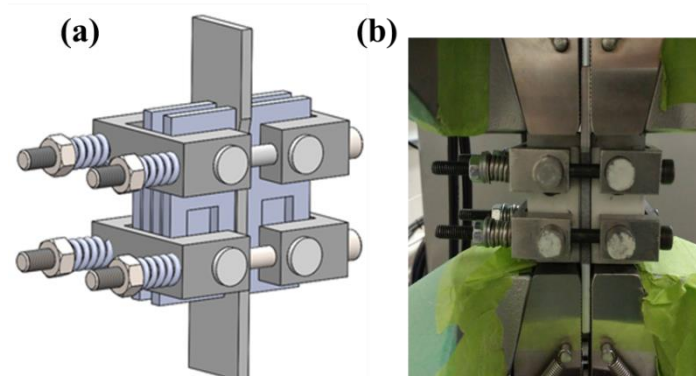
a) Conceptual design of anti-buckling fixture and sheet specimen assembly; b) the assembly mounted on the test frame facing DIC cameras.
